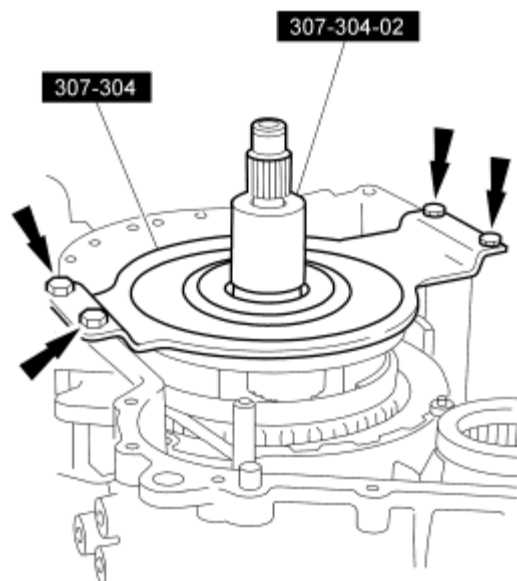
Reverse/Overdrive Ring Gear Assembly
